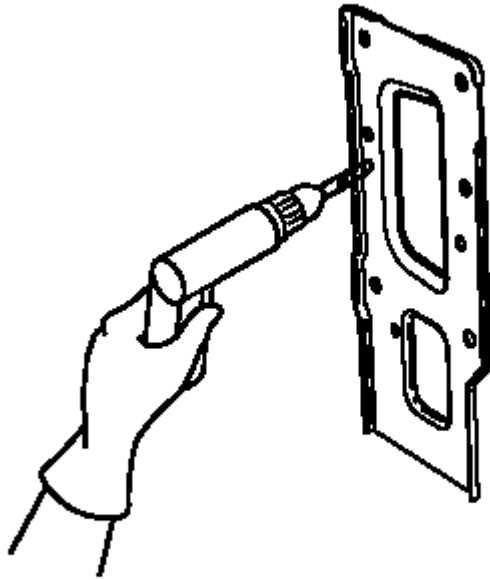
Drilling For Plug Welding Along Edges Of Front Suspension Frame Front Support
